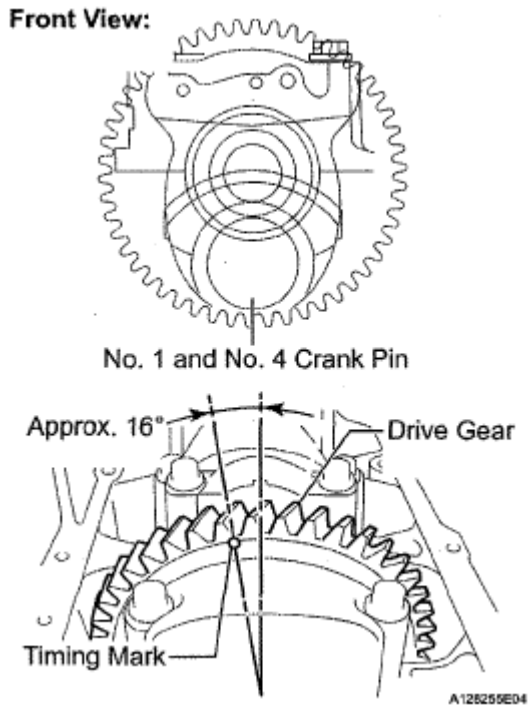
Identifying Timing Mark On Balancershaft Drive Gear
